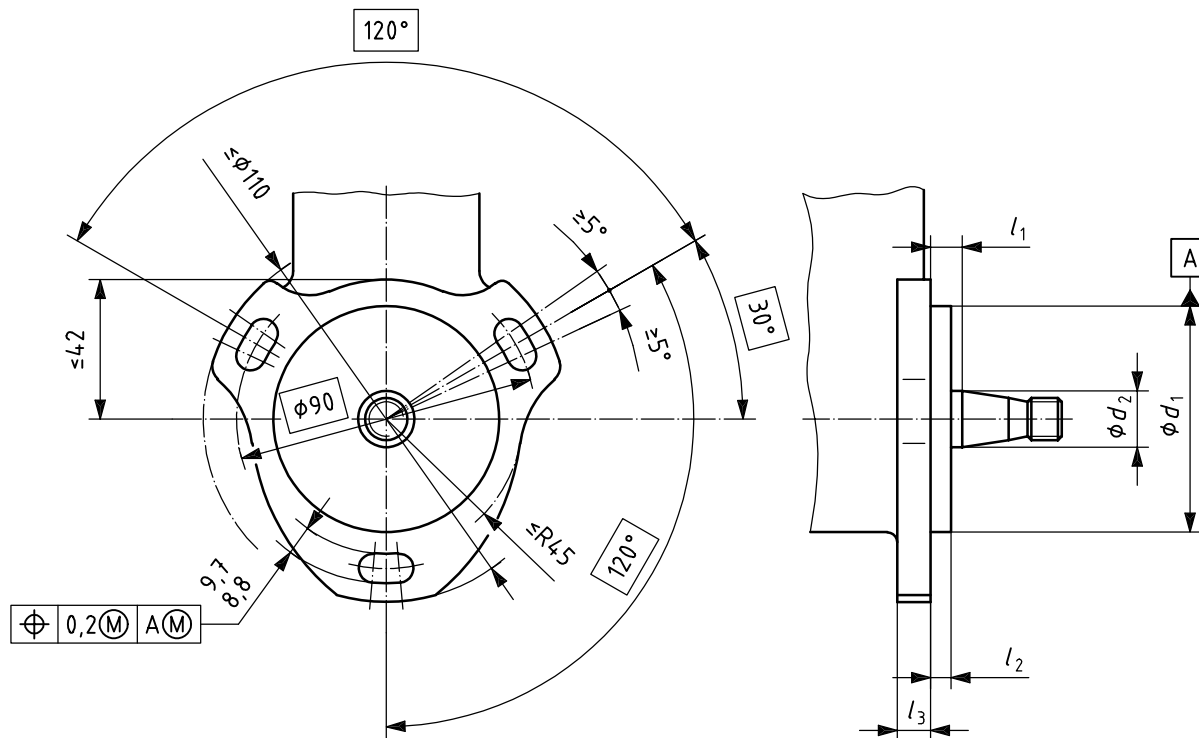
Fuel injection pumps — Type 4 end-mounting flange
